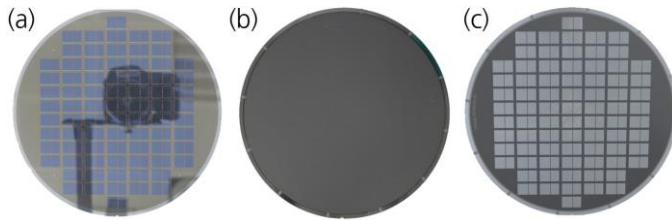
Demonstrator setup: (a) mounting the chips on interposer; (b) molding; (c) backgrinding to reveal chip backsides
